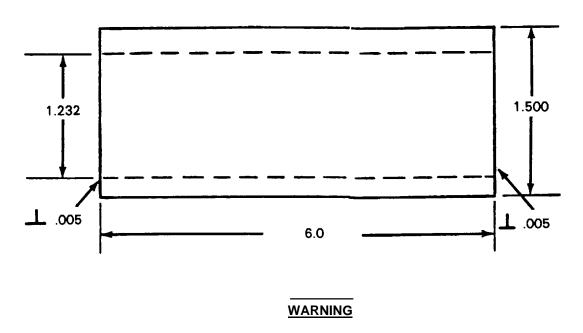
Hydraulic Piston Pump - Valve Block Bearing Race Removal Tool
